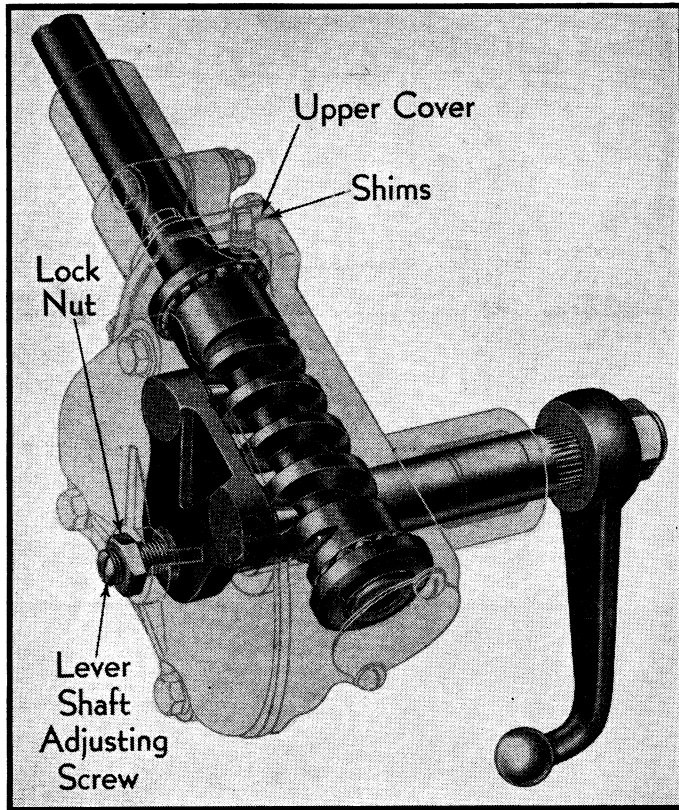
Ross cam and twin lever steering gear. Heavy duty trucks
